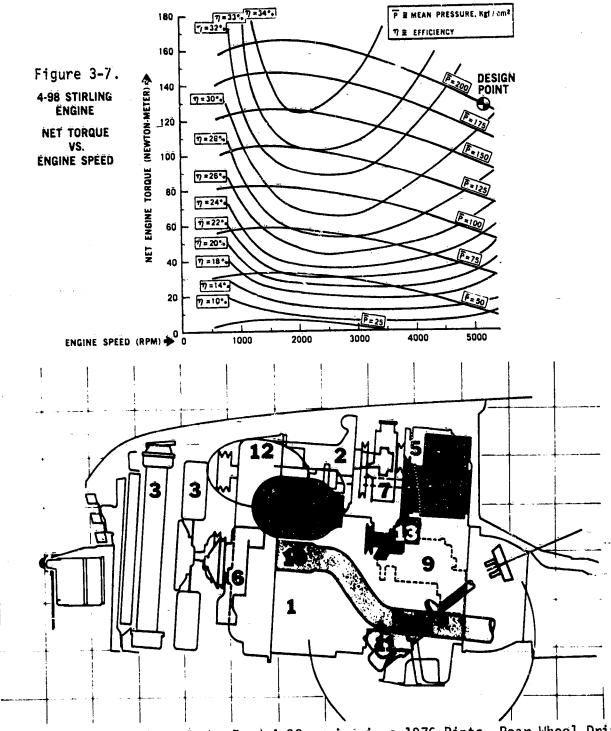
Packaging of the Ford 4-98 engine in a 1976 Pinto, Rear Wheel Drive.
